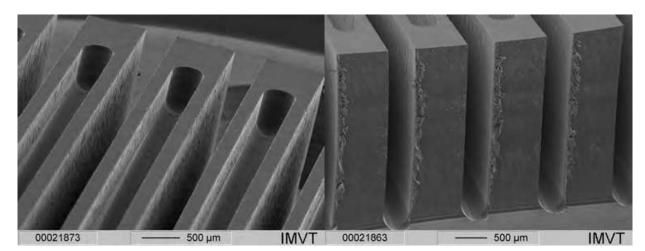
Details of the final heat exchanger made of stainless steel 1.4301. No burr formation at the surface level but some lateral burrs.
